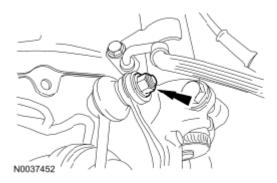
Locating Sway Bar Link Nut Courtesy of FORD MOTOR CO.
